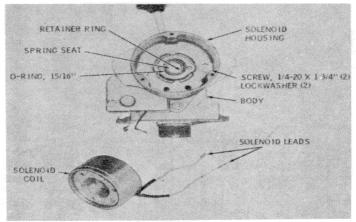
Shift Tower Assembly with Solenoid Removed 15-76
